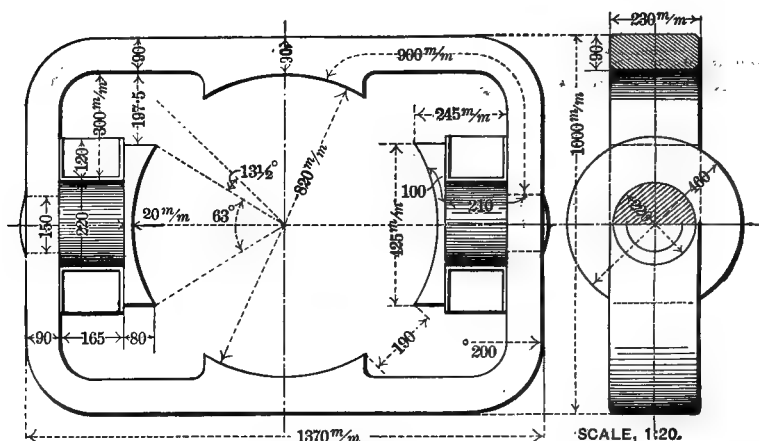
Dimensions of Field-Magnet Frame, 100-KW Fourpole Iron-Clad Generator.
